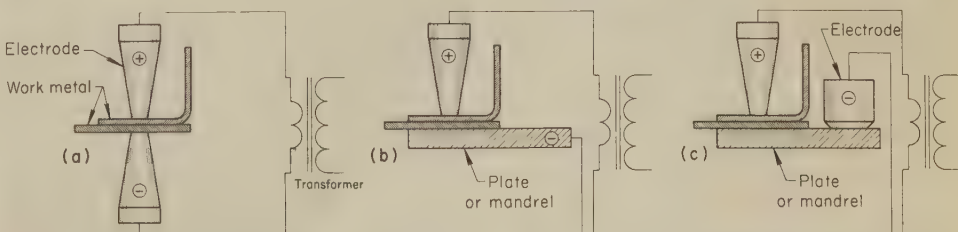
Three arrangements of work metal and electrodes used for making single spot welds by direct welding
